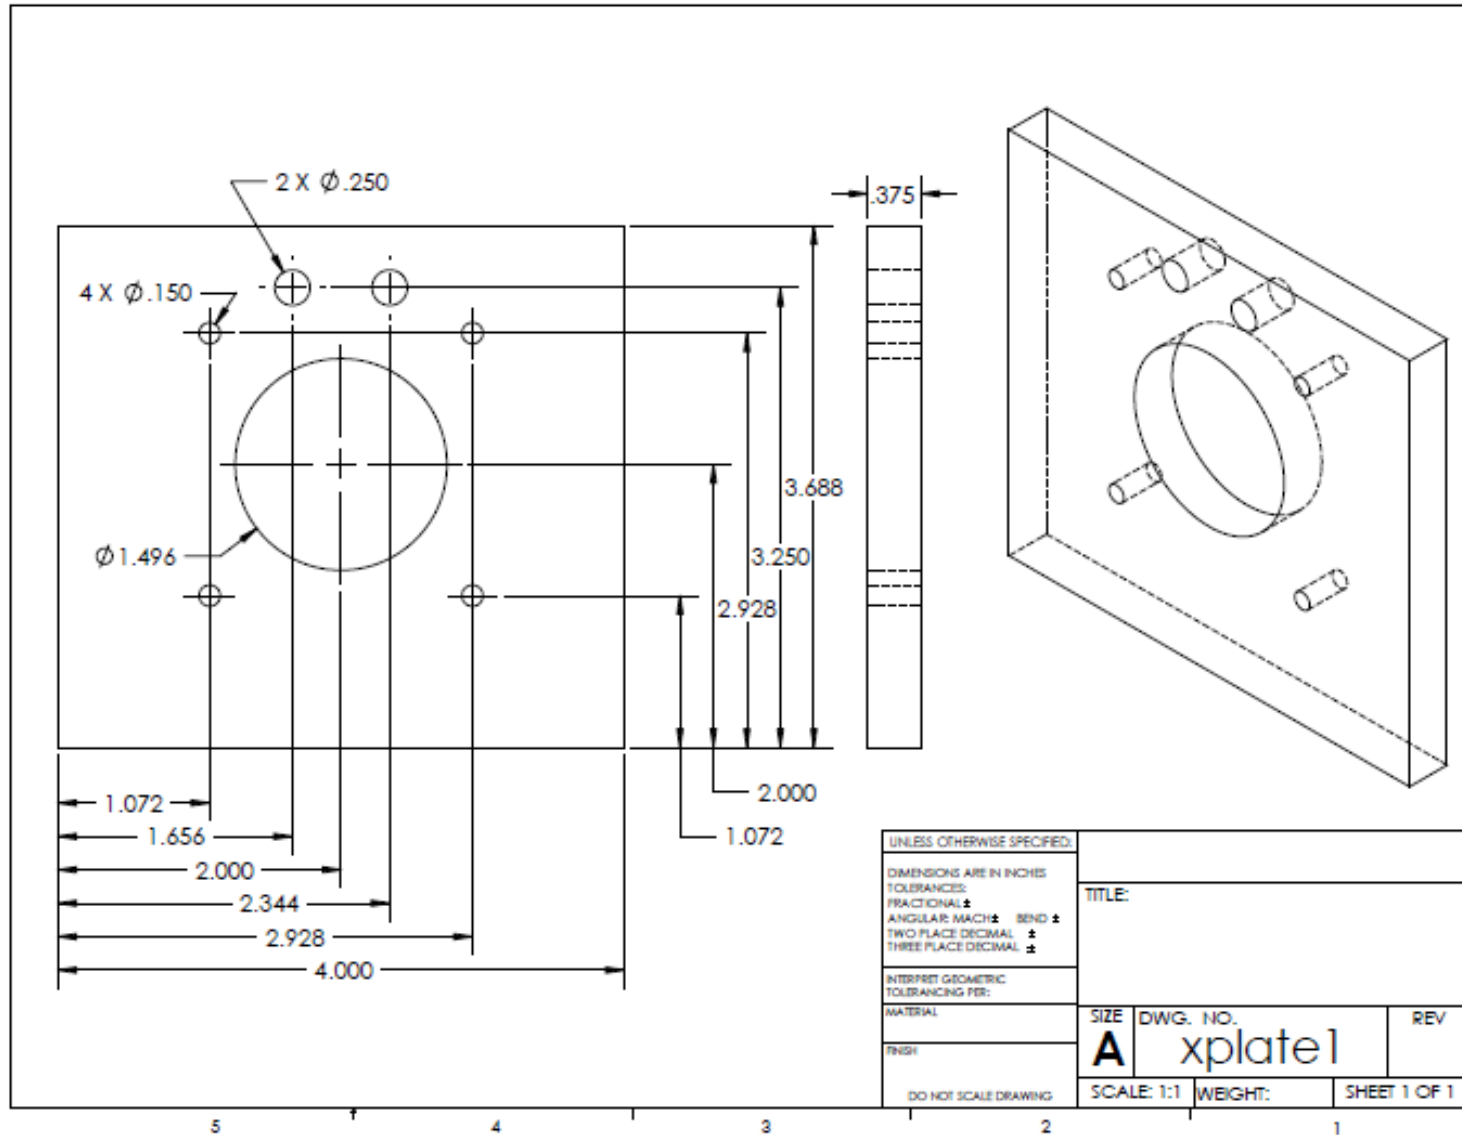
Engineering drawing of the X-axis motor mount plate #1
